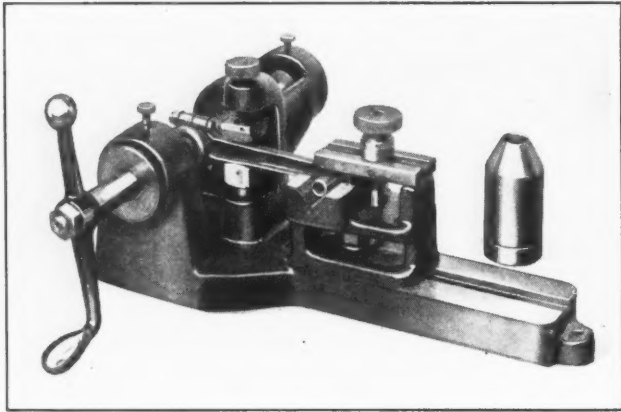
Foster-Johnson Connecting-rod Reboring Fixture
